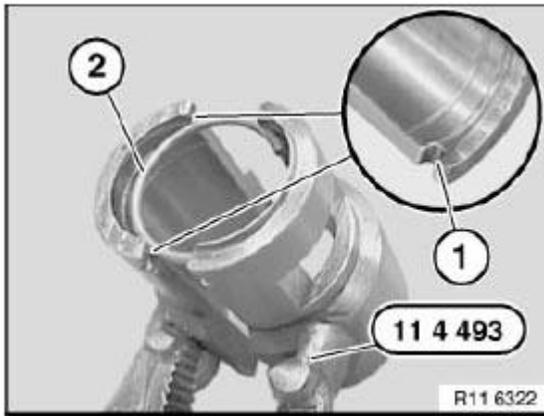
Inserting Piston Circlip Into Groove Of Special Tool
